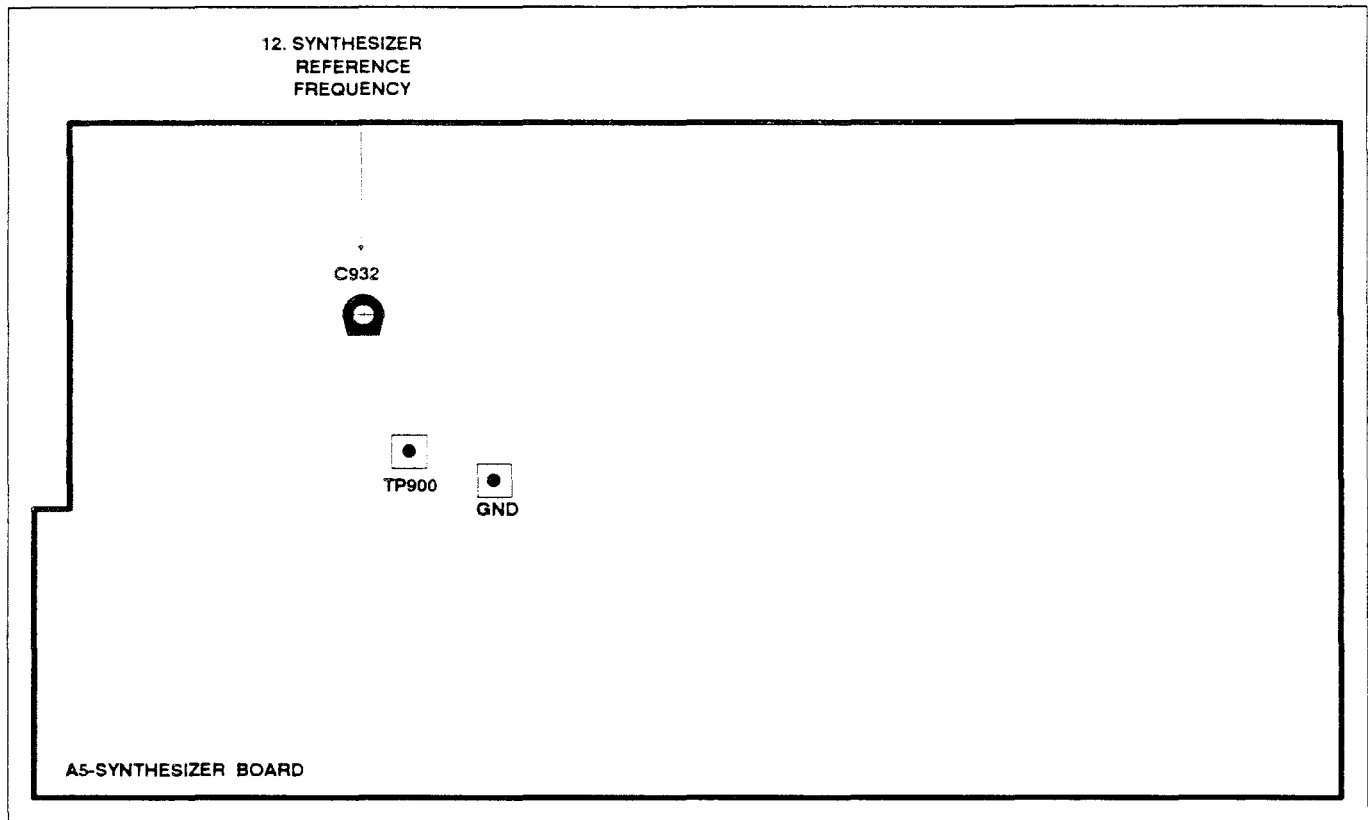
A5 Synthesizer Board Adjustment Locations.
